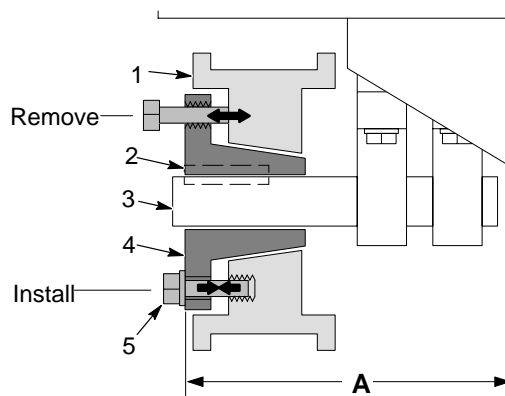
Idler Pulley Replacement (Side View Cutaway)
